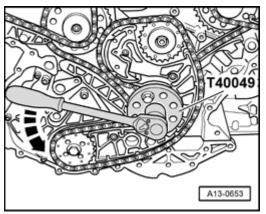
Rotating Crankshaft To TDC Ignition Timing Courtesy of VOLKSWAGEN UNITED STATES, INC.
